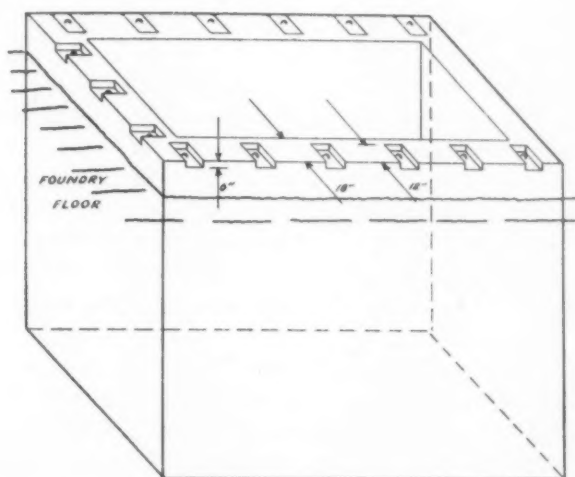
GENERAL VIEW OF A CASTING PIT.
